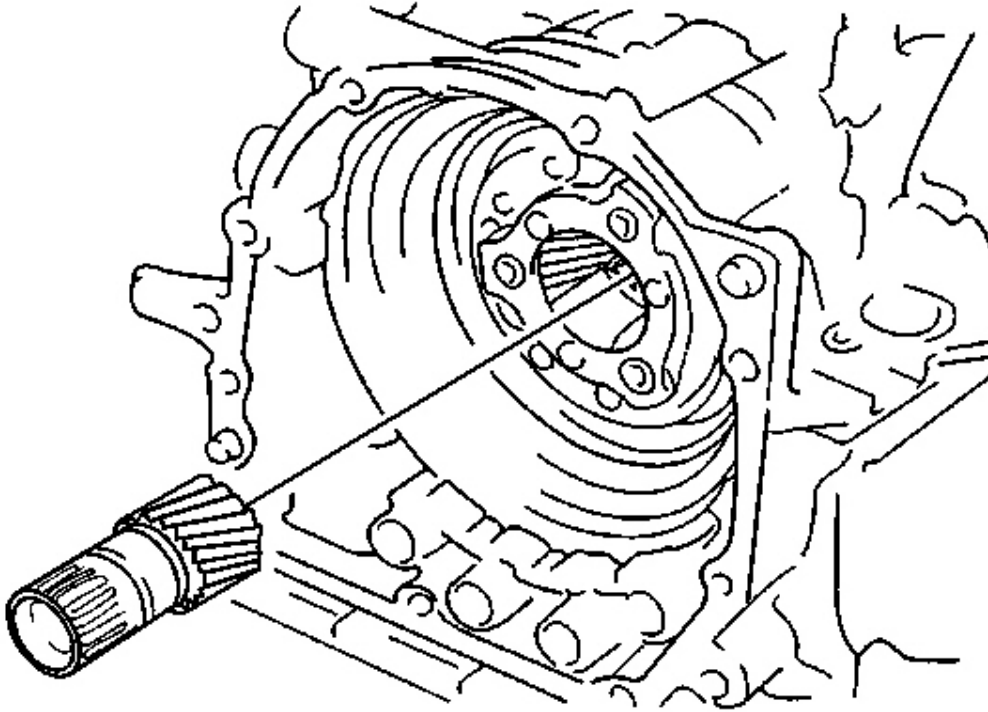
Front Planetary Sun Gear & Thrust Bearing Race
